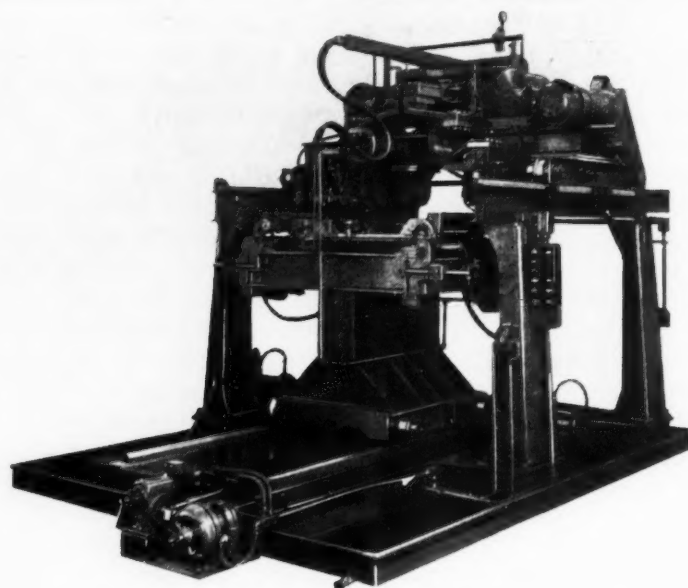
A Machine Designed for Seam-welding Inner Linings of Refrigerators
